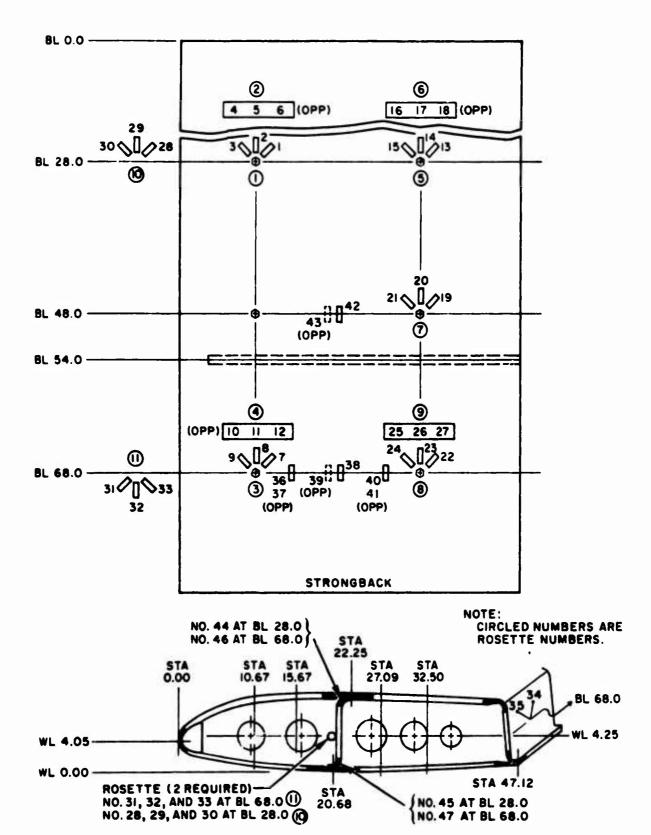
Strain Gage and Rosette Locations on No. 3 Wing Section.
